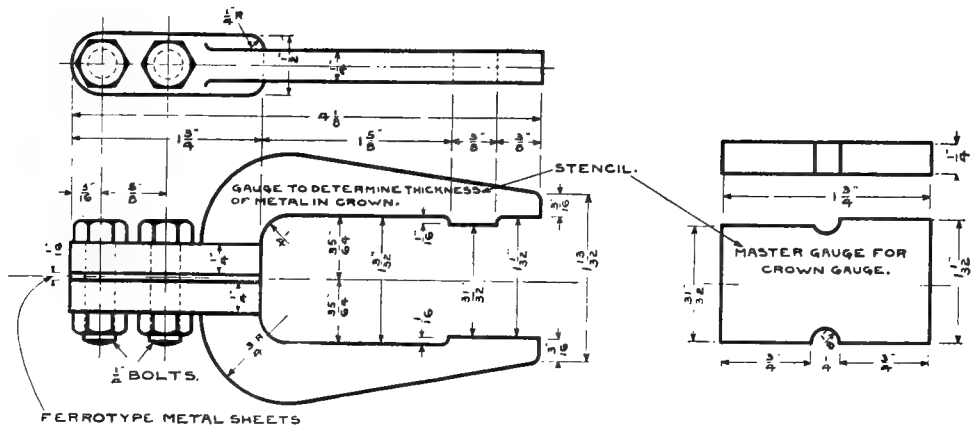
Gage for 6 in. by 11 in. Journal Bearings. (M. C. B. Sheet 14A.)
